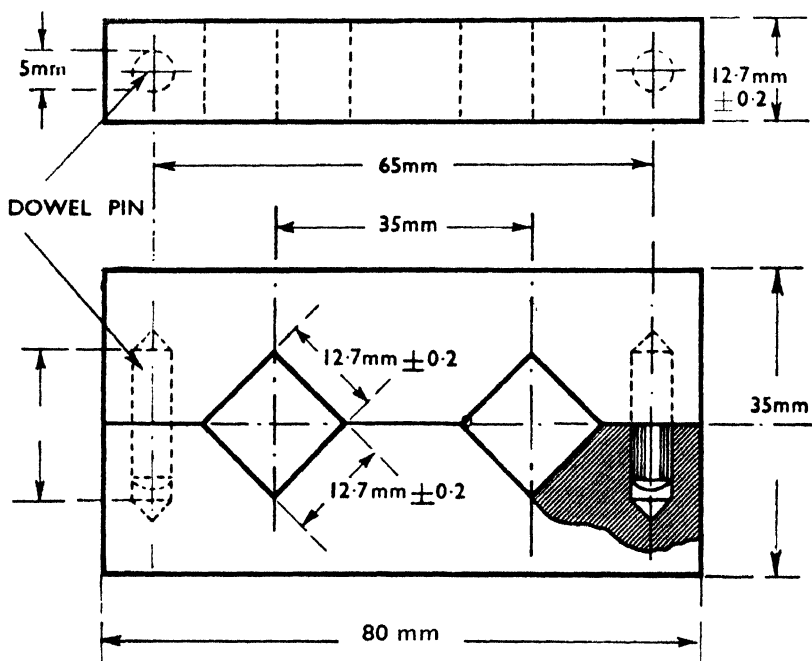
Half-inch Cube Test for Pitch—Elevation and Plan of Assembled Apparatus.
